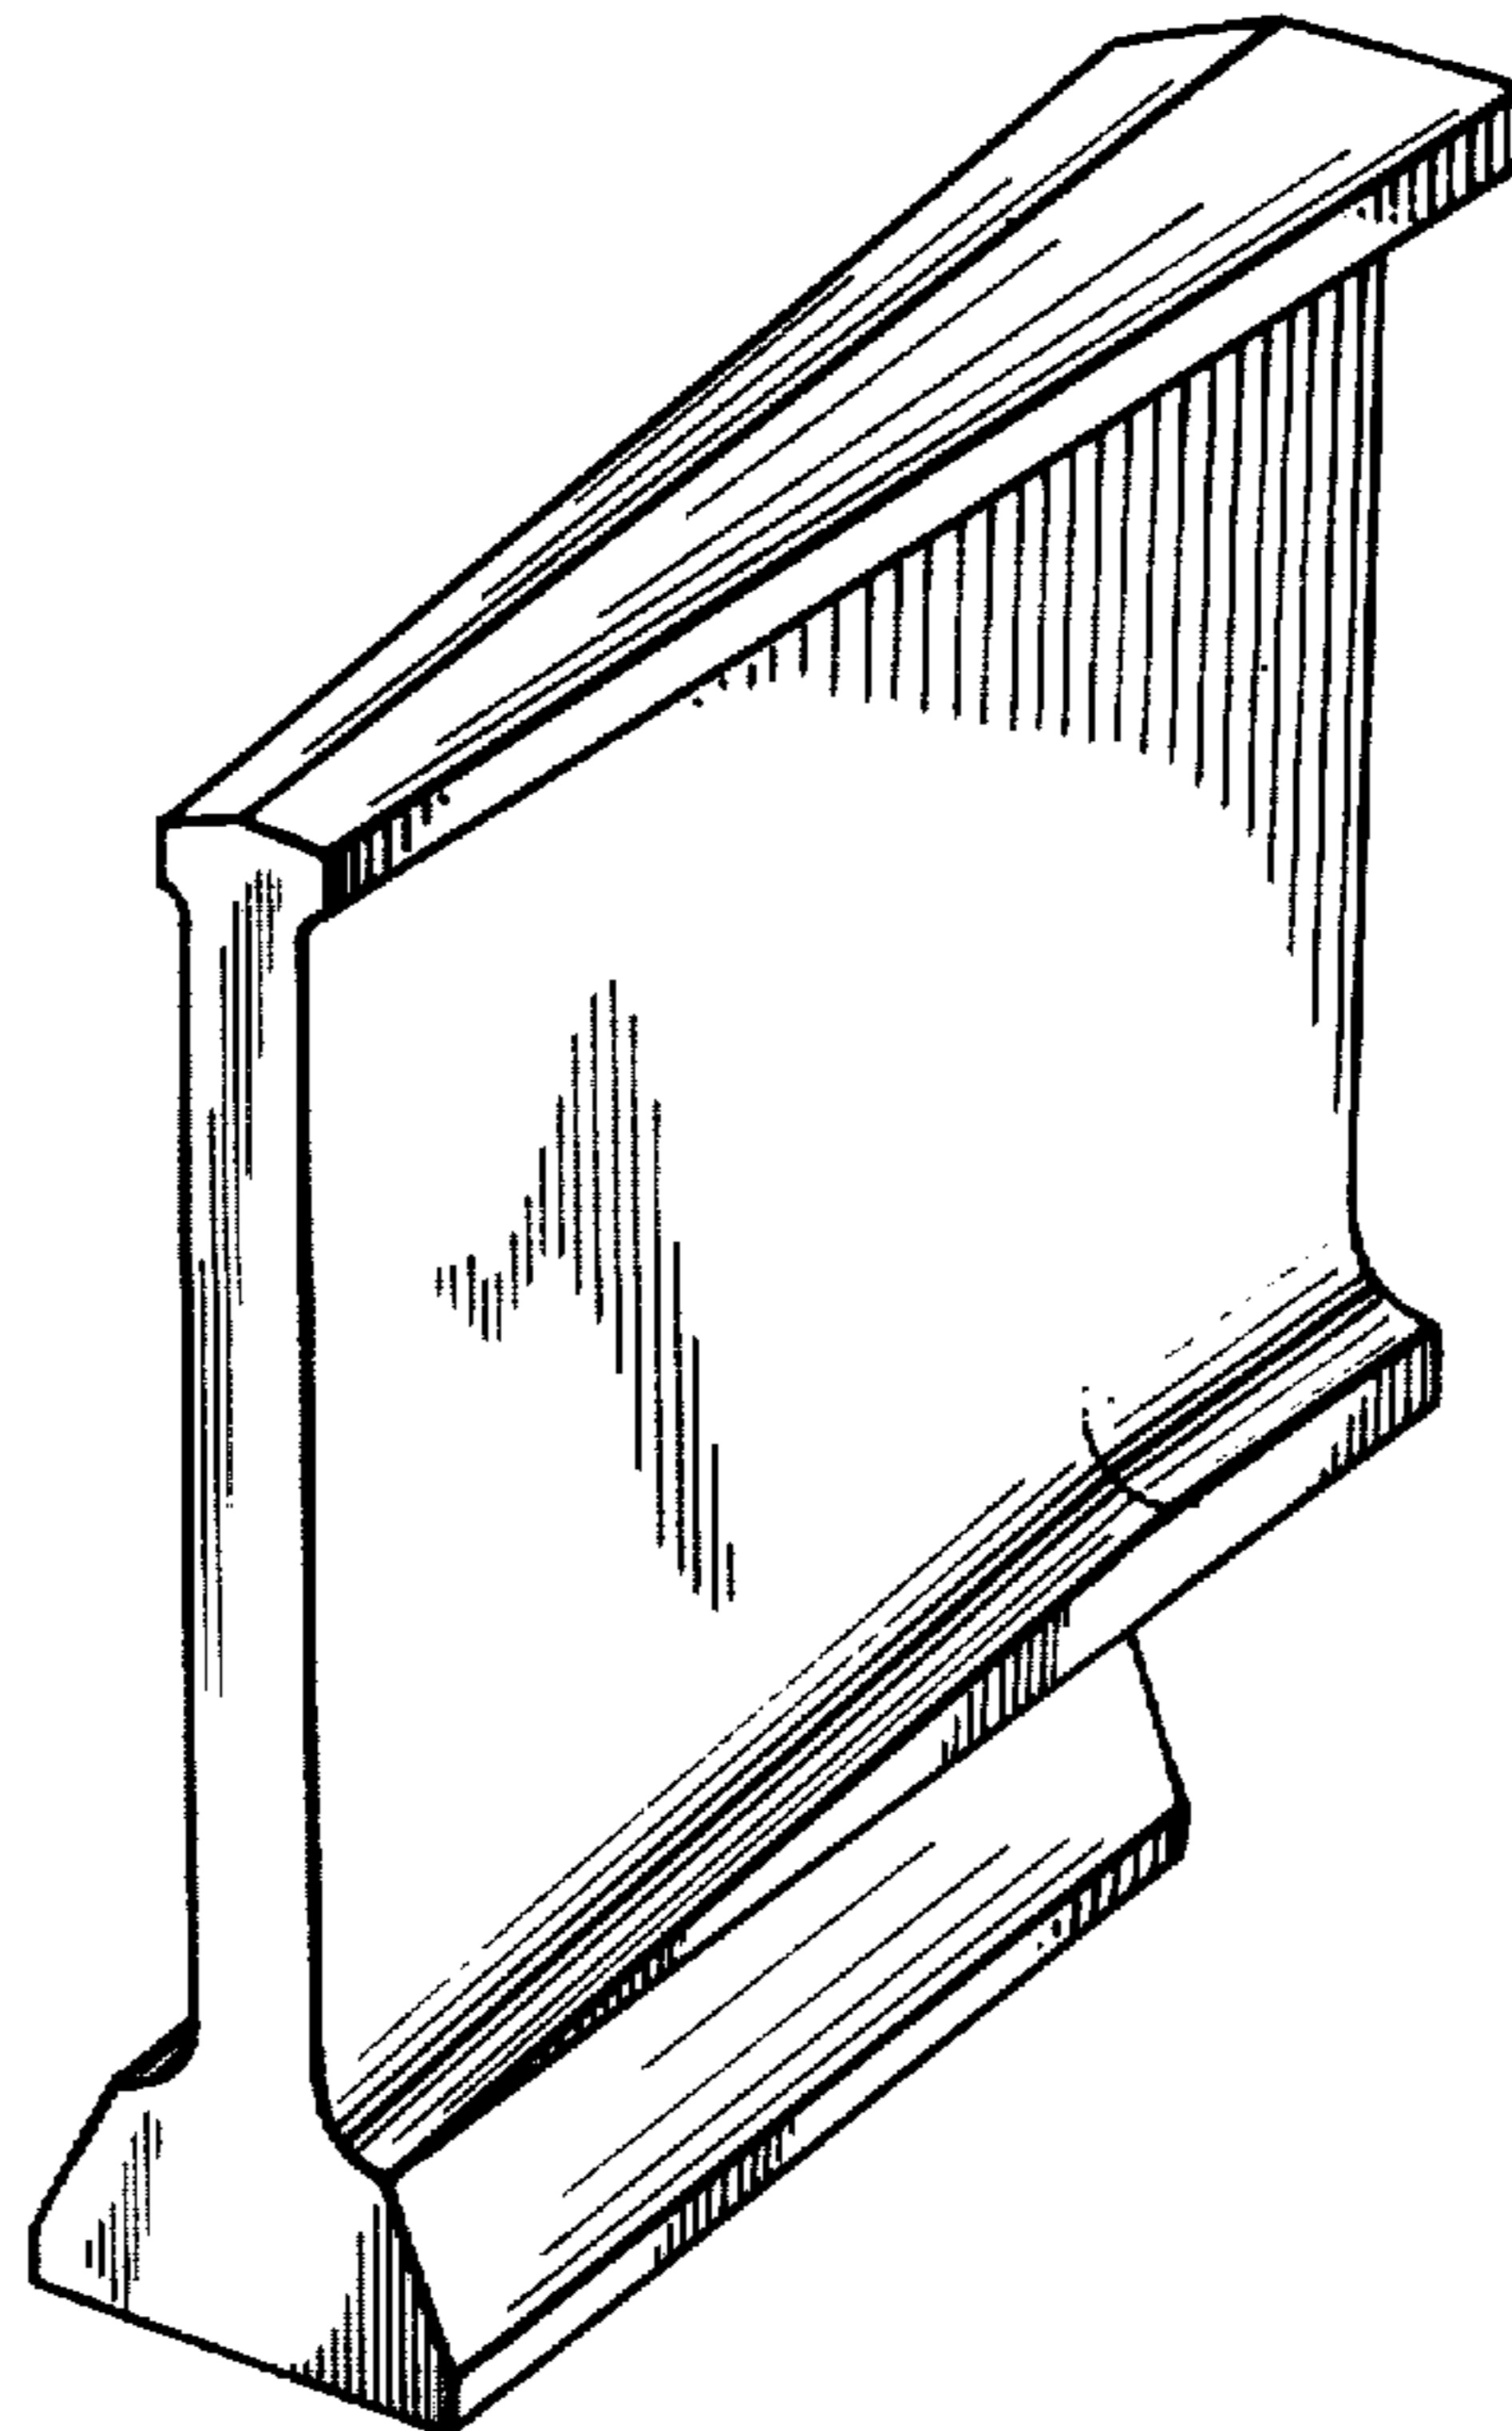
is a side elevational view of an impeller wheel blade for an abrasive blasting machine showing my new design.
